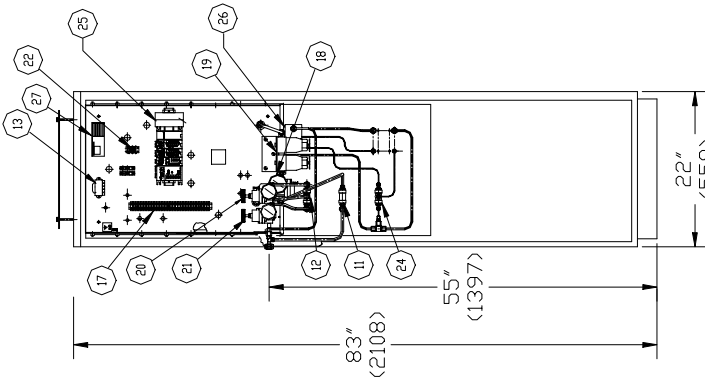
GA500WC – RR Gas Analyzer Equipment Drawing
